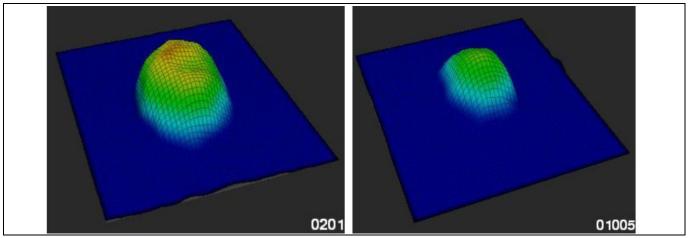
Typical SPI measurements of printed solder paste for 0201 (left) and 01005 (right) and WLL packages.
